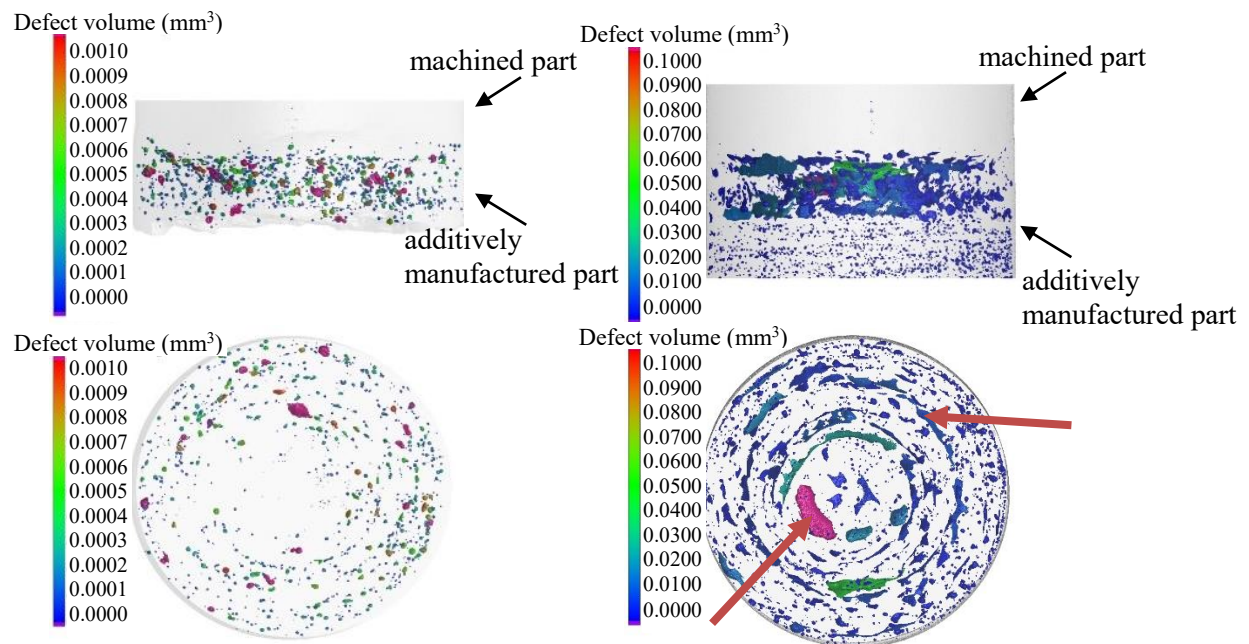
Tomographs of welded parts in the welded region, left: W1 part, right: W2 part (scale: defect volume (mm³))
